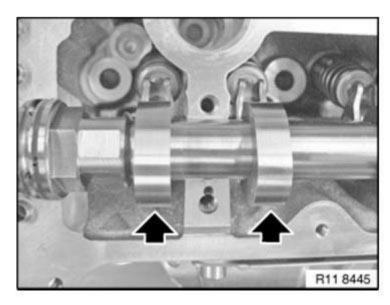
Locating Exhaust Camshaft Cams Courtesy of BMW OF NORTH AMERICA, INC.
